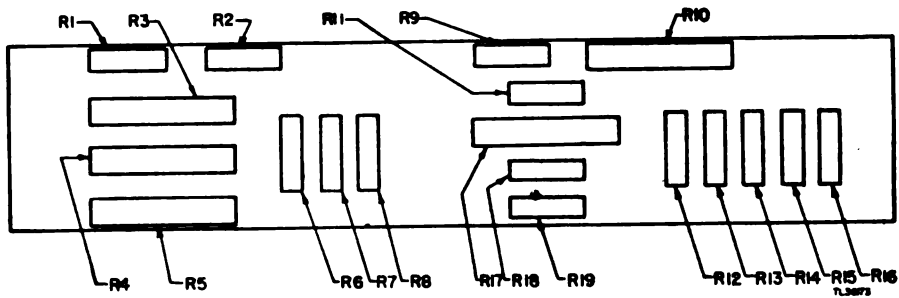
Rectifier Power Unit PP-25/MPN-1, mounting board.
